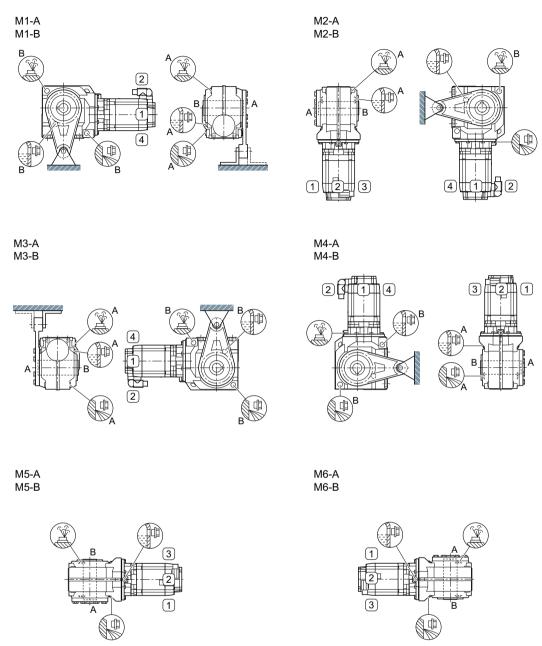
Mounting positions for servo helical worm geared motor CAD, shaft-mounted design, frame sizes 49 - 89, 2 stage
